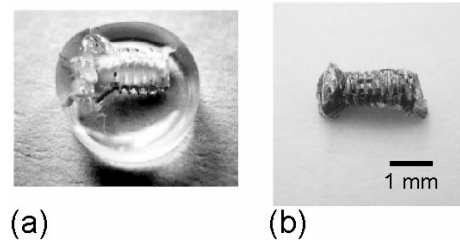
(a) Resin mold of screw shape, and (b) screw made of copper fabricated via the molding process.
